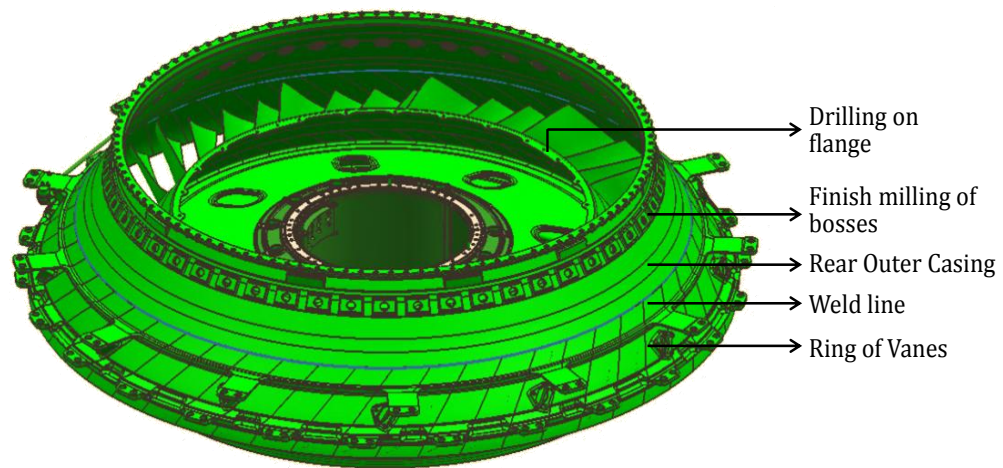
Front Bearing Housing assembly of Trent 900 and needed finish machining operations
